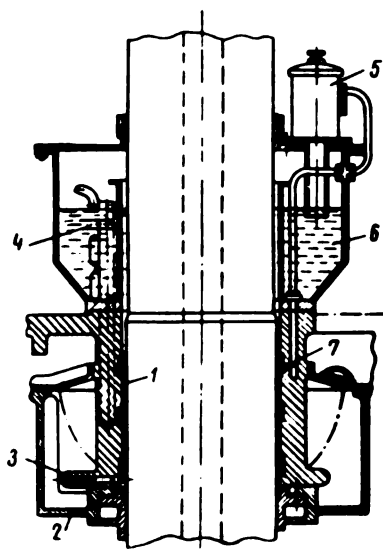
Self-lubricating guide bearing (built by "Nohab")
